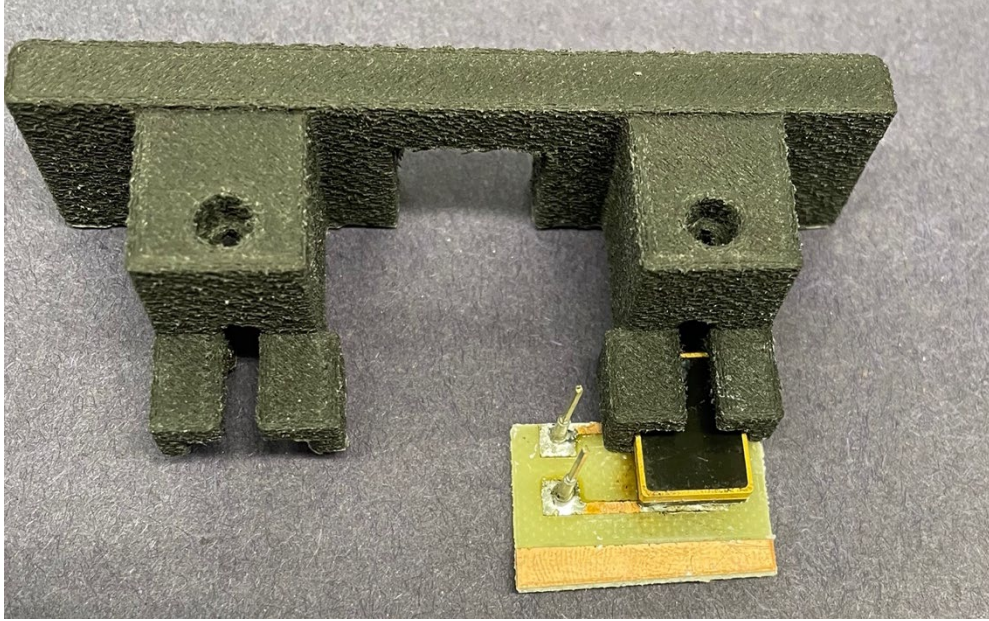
NRL Device Mounted on Custom-milled PCB in 3D-printed Polyethylene Carbon Fiber Cradle
